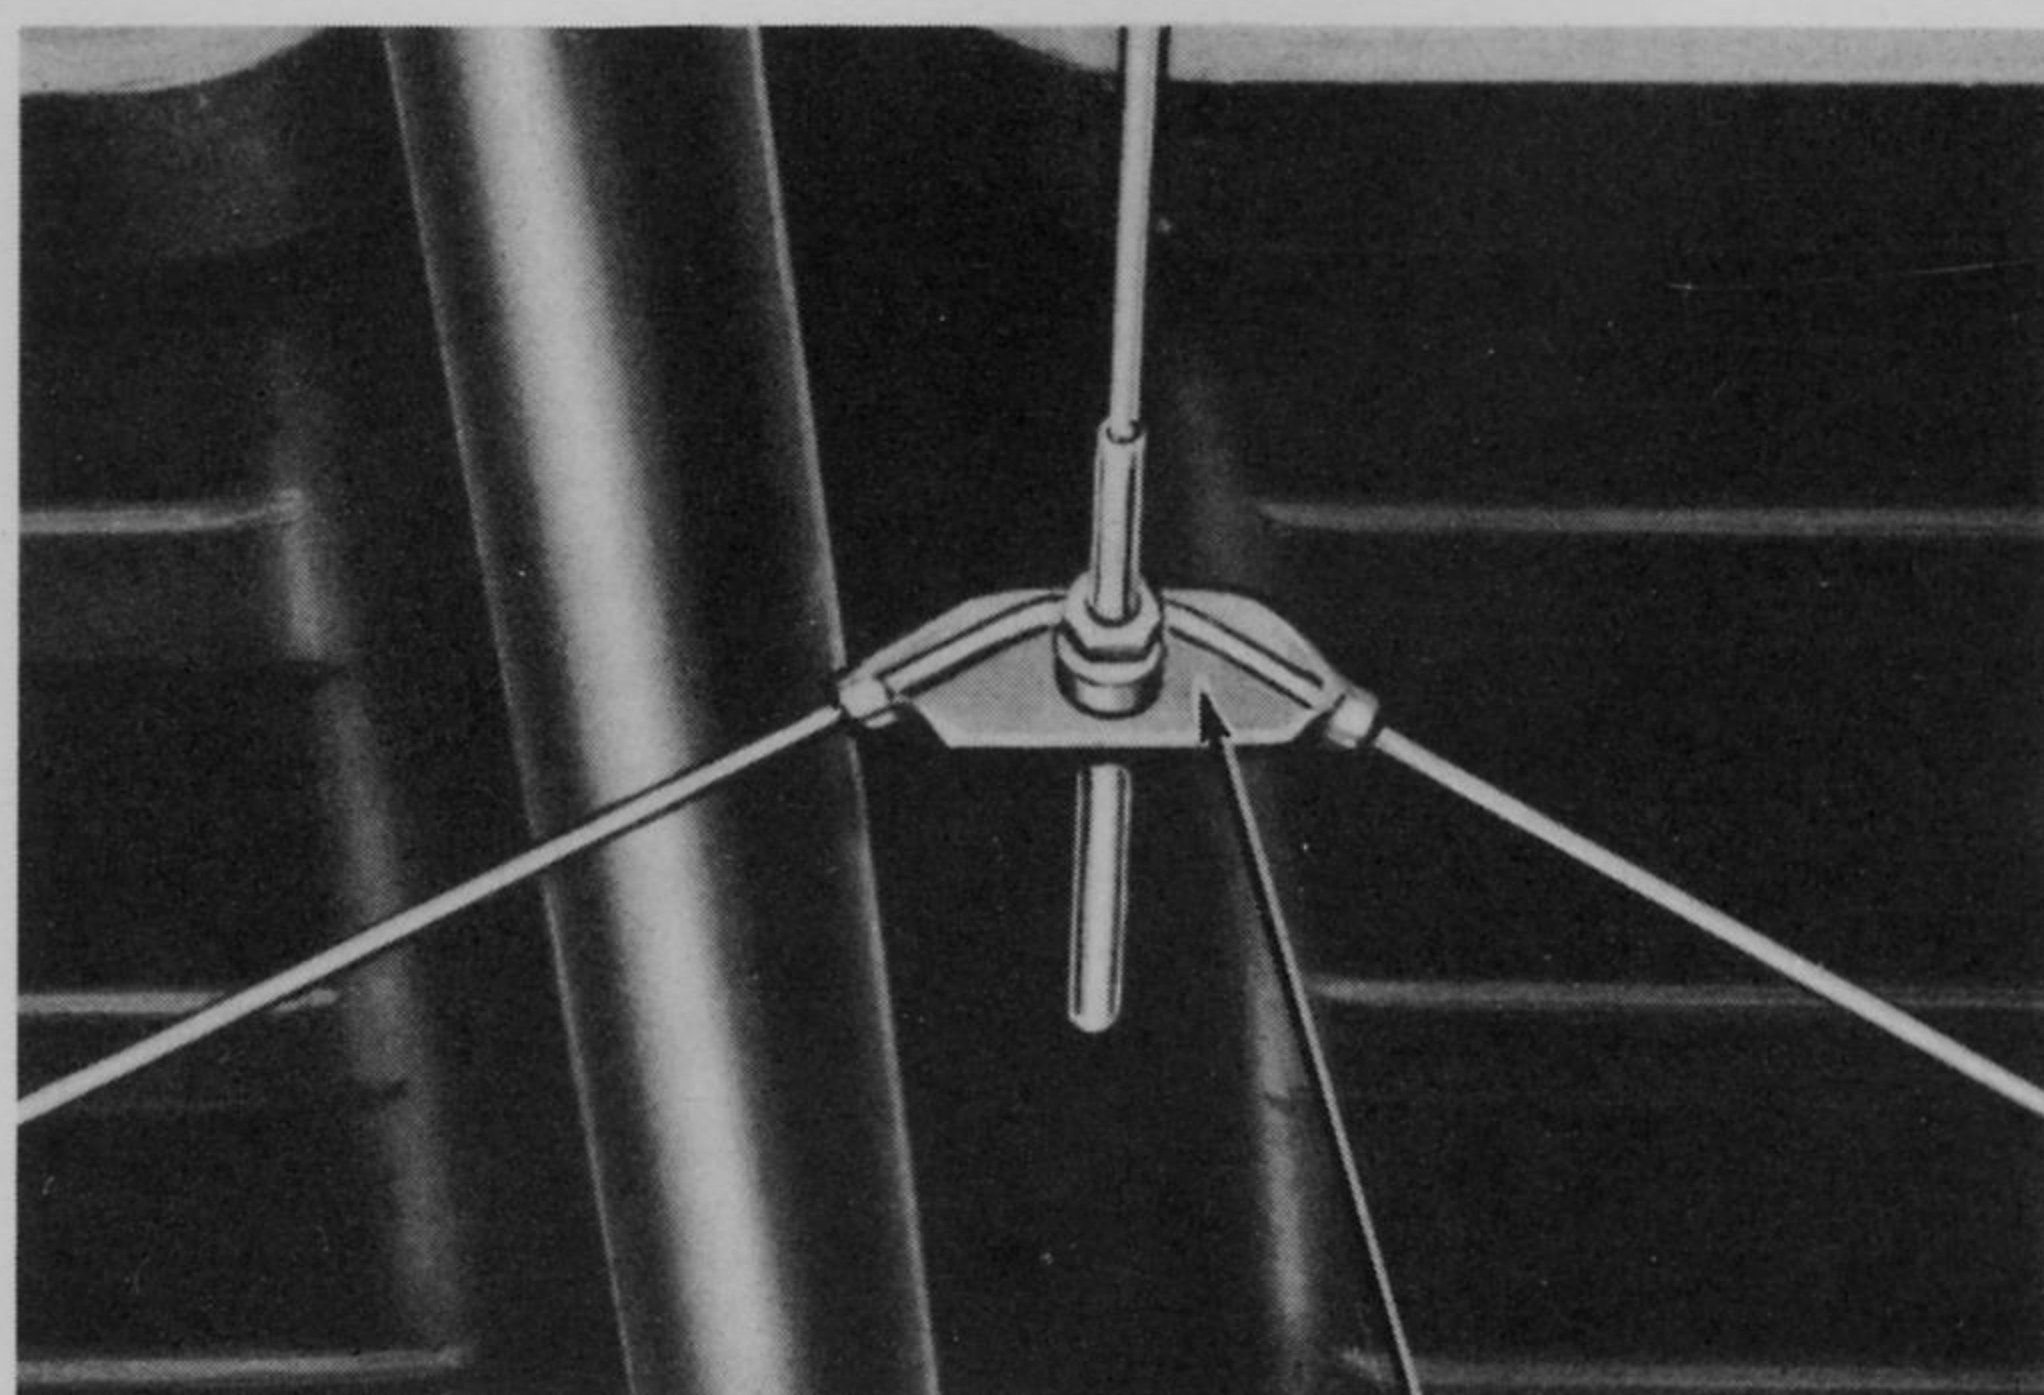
Hand Brake Equalizer Lever and Rear Cable—Kaiser
